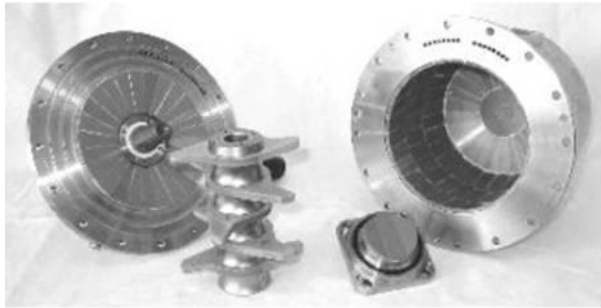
disassembled grinding unit W01-2lm-SiN (flange, rotor, vessel & blind-lid)
